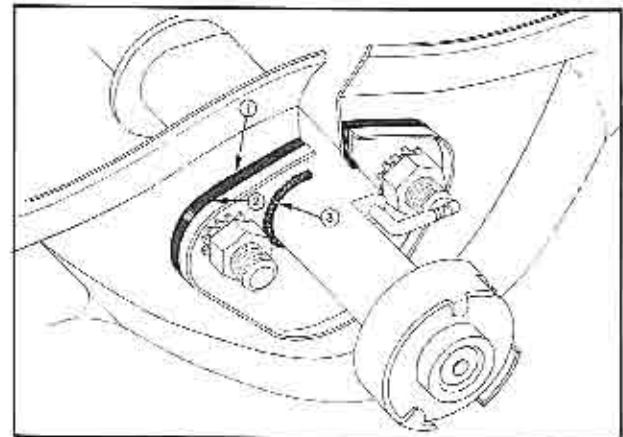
Sealing Windshield Wiper Transmission Shaft
